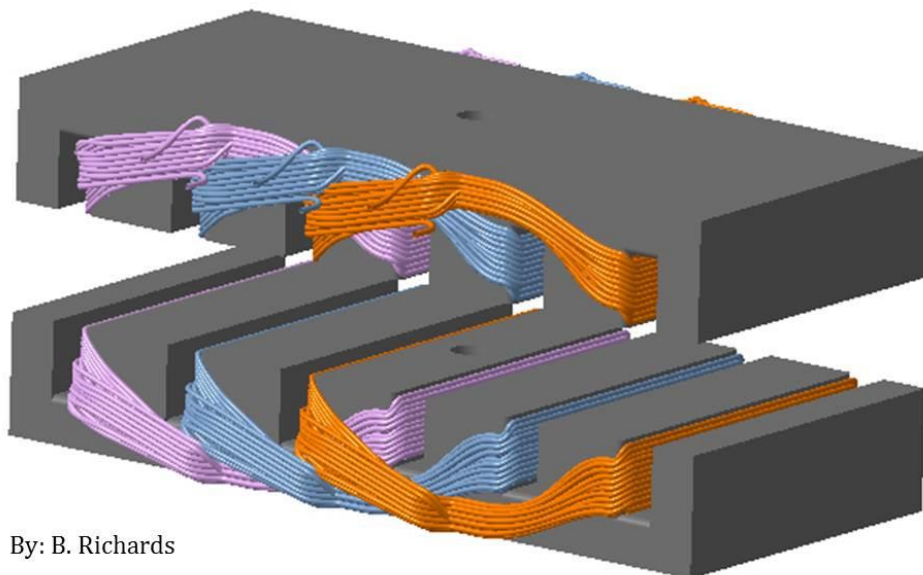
3D view of the two transformer halves with windings. In the road side only one segment is shown, but in reality continues on both sides.
